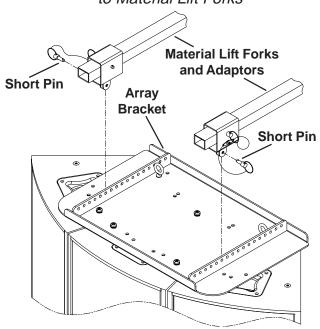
Assembling the Array Bracket to the Material Lift Adaptors
